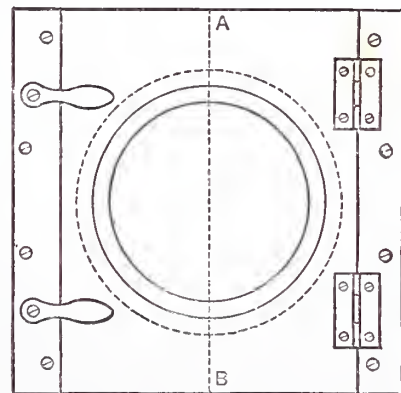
Plan of Object Box, with Glass Removed, showing Construction of Top (half full size).
